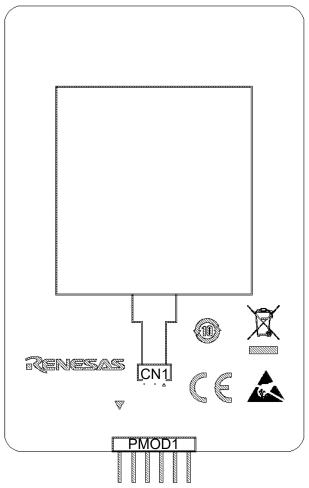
MIP-LCD Component Placement (Top-Side View)
